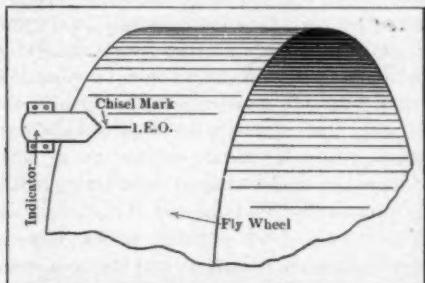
Method of marking the flywheels of a motor so as to replace timing mechanism properly
